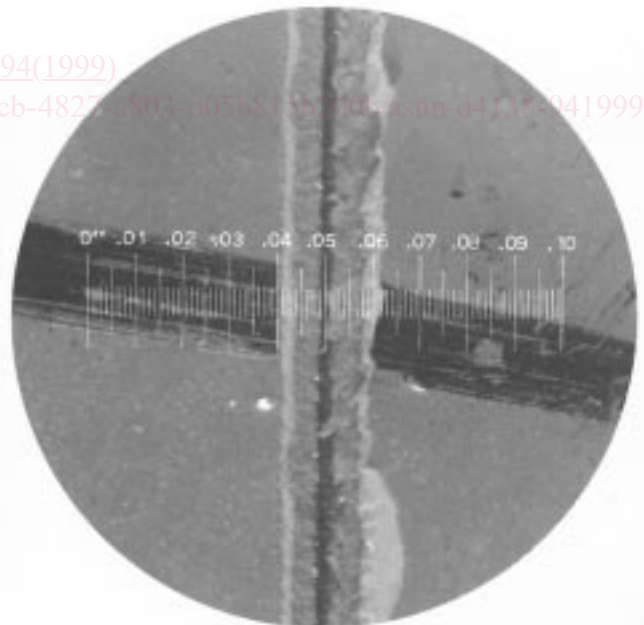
Typical View Through Microscope of Tooke Inspector Gage Showing Reticle
